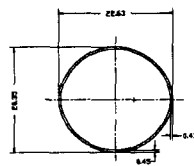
Desired final shape of the multi-stage elliptic cup drawing (Stage 4)
